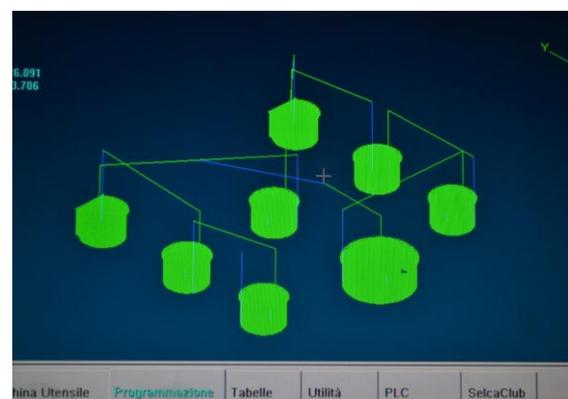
CNC simulation for injection mold machining –on FAMUP MC120 EVOLUTION
